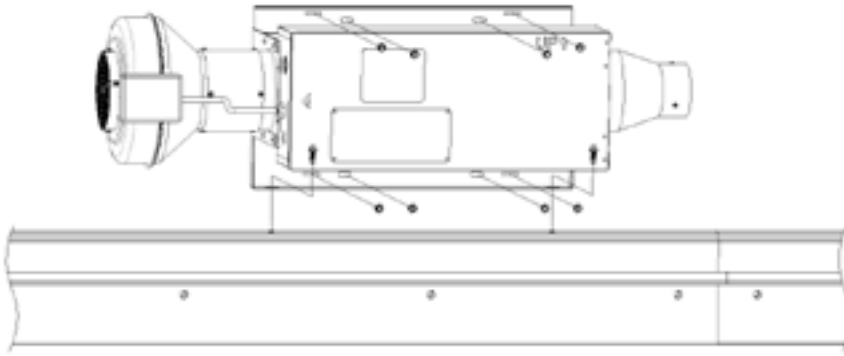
Mount Center Duct Assembly on Center of Header/Rail Assembly
